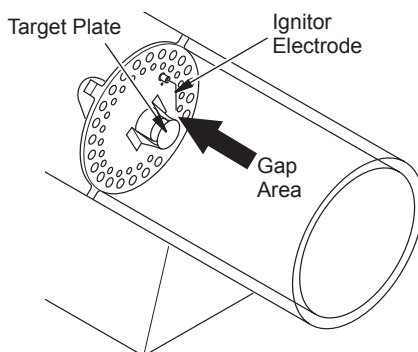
Clearance between Ignitor Electrode and Target Plate
